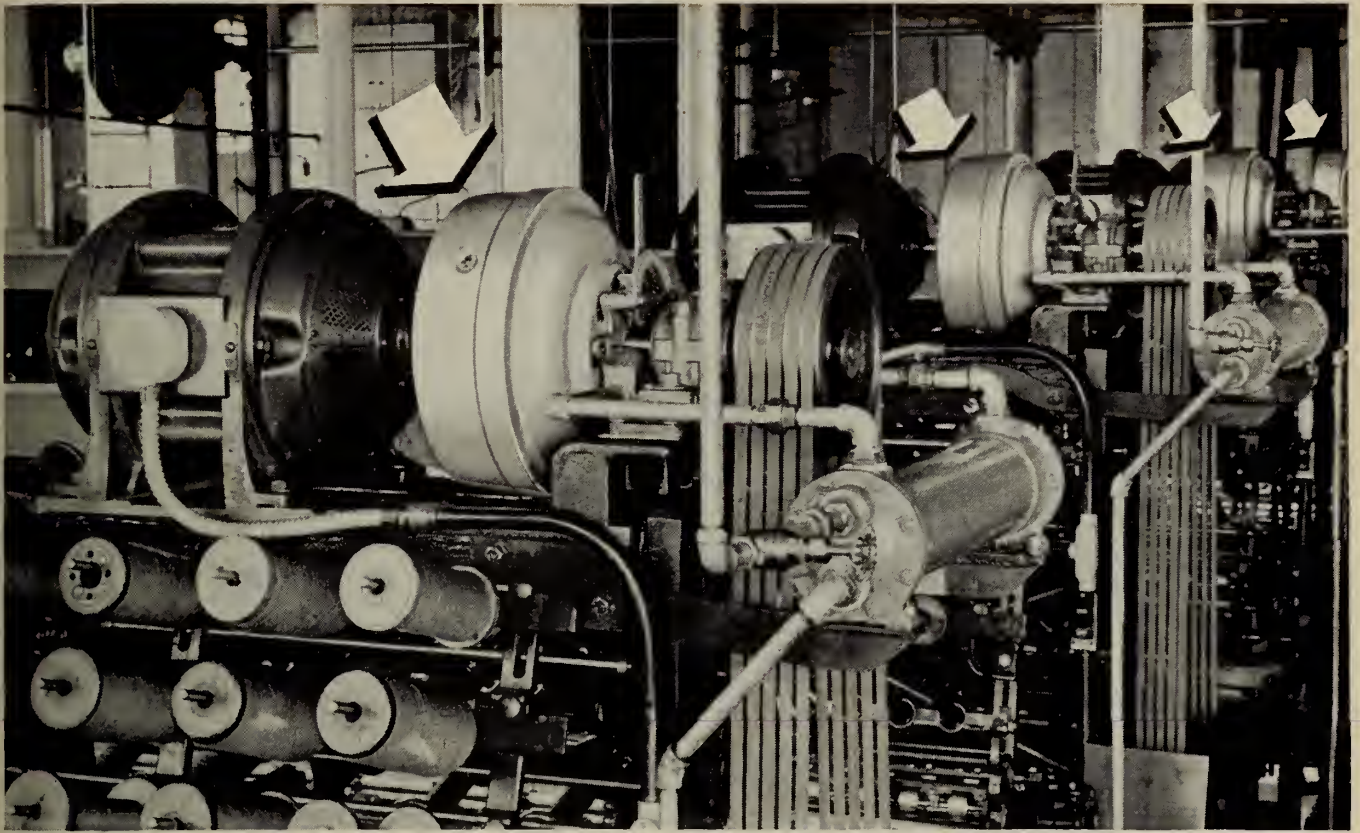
of 12 ring-spinning frames equipped with Gýrol Fluid Drives.
